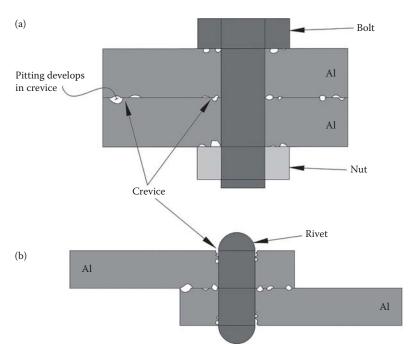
Illustration of typical crevice corrosion: (a) aluminum sheets connected by bolt; (b) sheet connected by rivet
